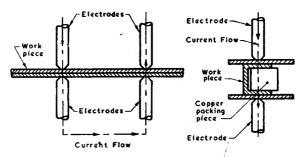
EXAMPLES OF SERIES-SPOT WELDING
